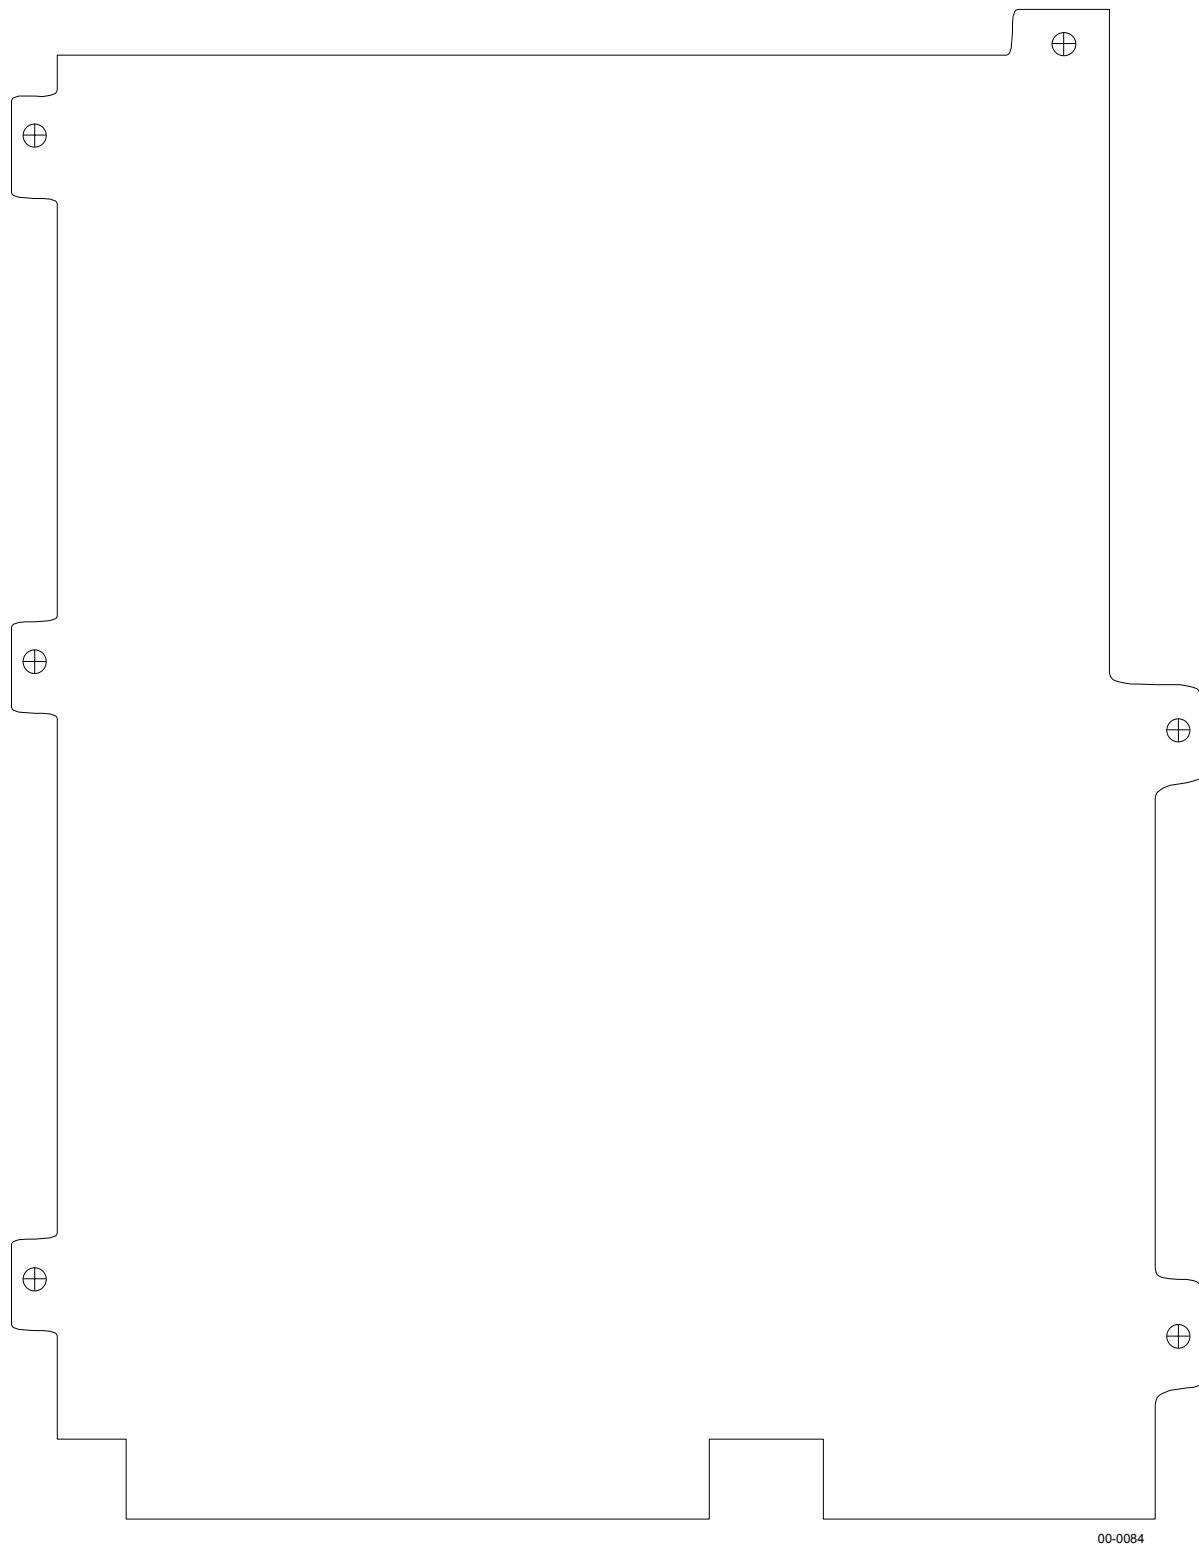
Type 797228-1 RF Tuner Assembly (A3) Screw Location
